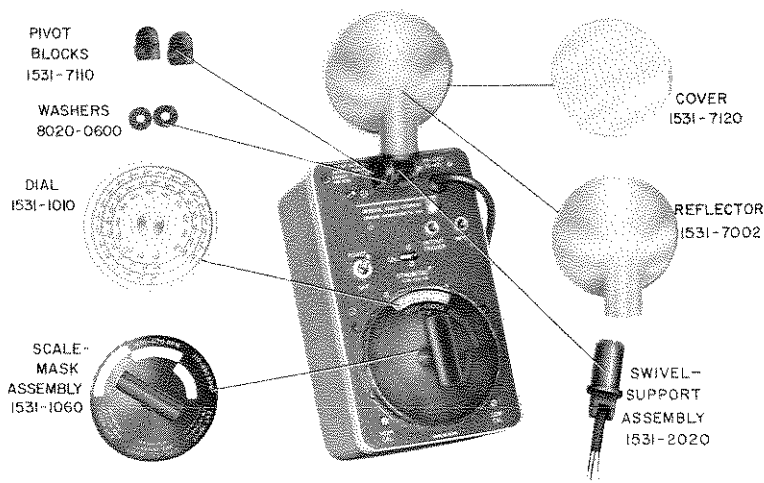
Location and part numbers of mechanical parts for the Type 1531 Strobotac.
